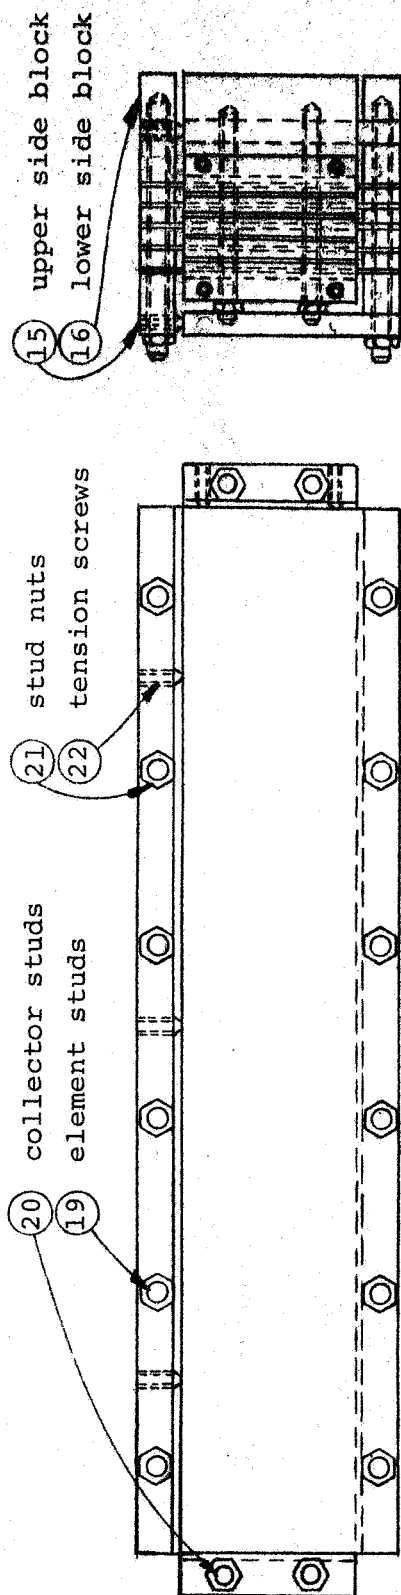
Assembly drawing of recommended electrogenerator mechanical design with rectangular fuel elements.
